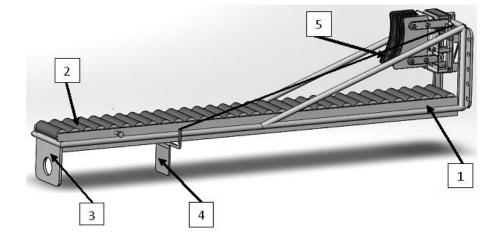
General layout of the lodging tower section: 1 - steel twelve-sided frame; 2 - lodgment
